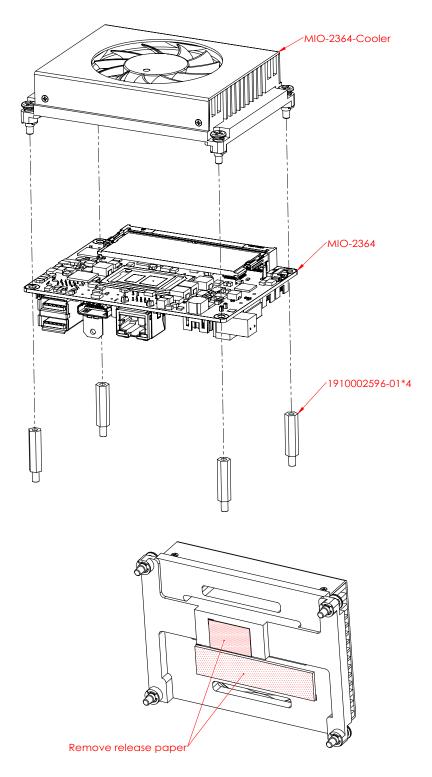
MIO-2364 Mechanical Drawing (with Heatsink)
